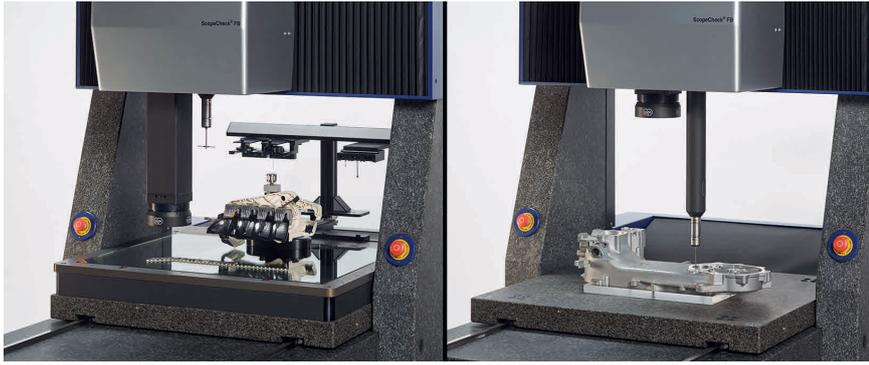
The compact bridge-type machine allows multisensor measurements without measuring range restrictions due to the double ram design (left); heavy workpieces can be measured directly on the measuring table (right). (© Werth)
